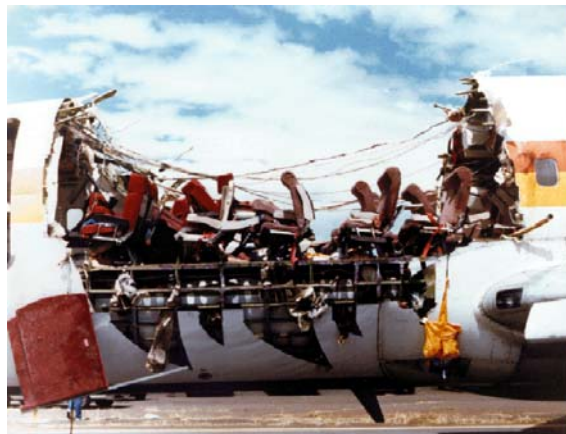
Fatigue Fracture of Boeing 737-200 Fuselage Riveted Joints (combined with the effect of corrosion).
